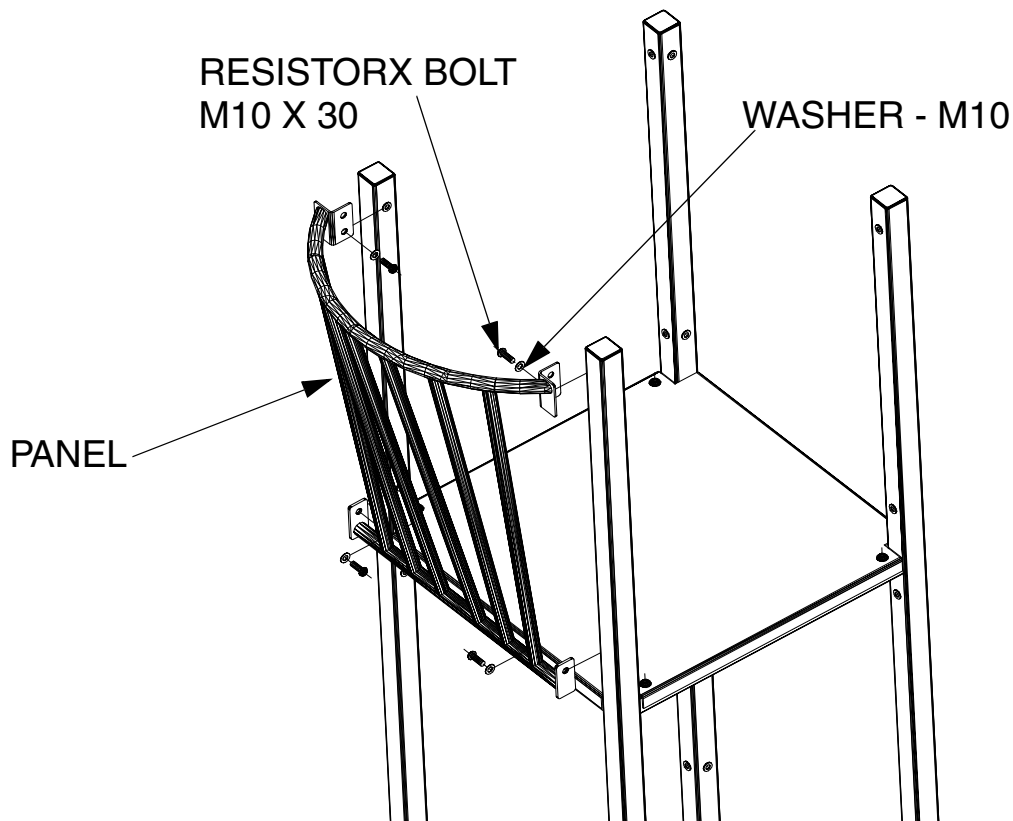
TYPICAL FIXING ARRANGEMENT FOR PANEL
